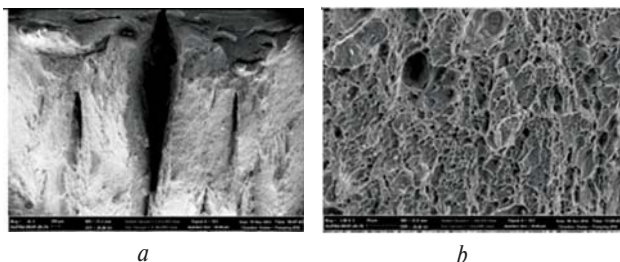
Fracture surfaces of the samples of pipe basic metal after impact strength testing at -60 °C: *a* – pipe No. 1, KCV = 98 J/cm², *b* – pipe No. 3, KCV = 316 J/cm²
